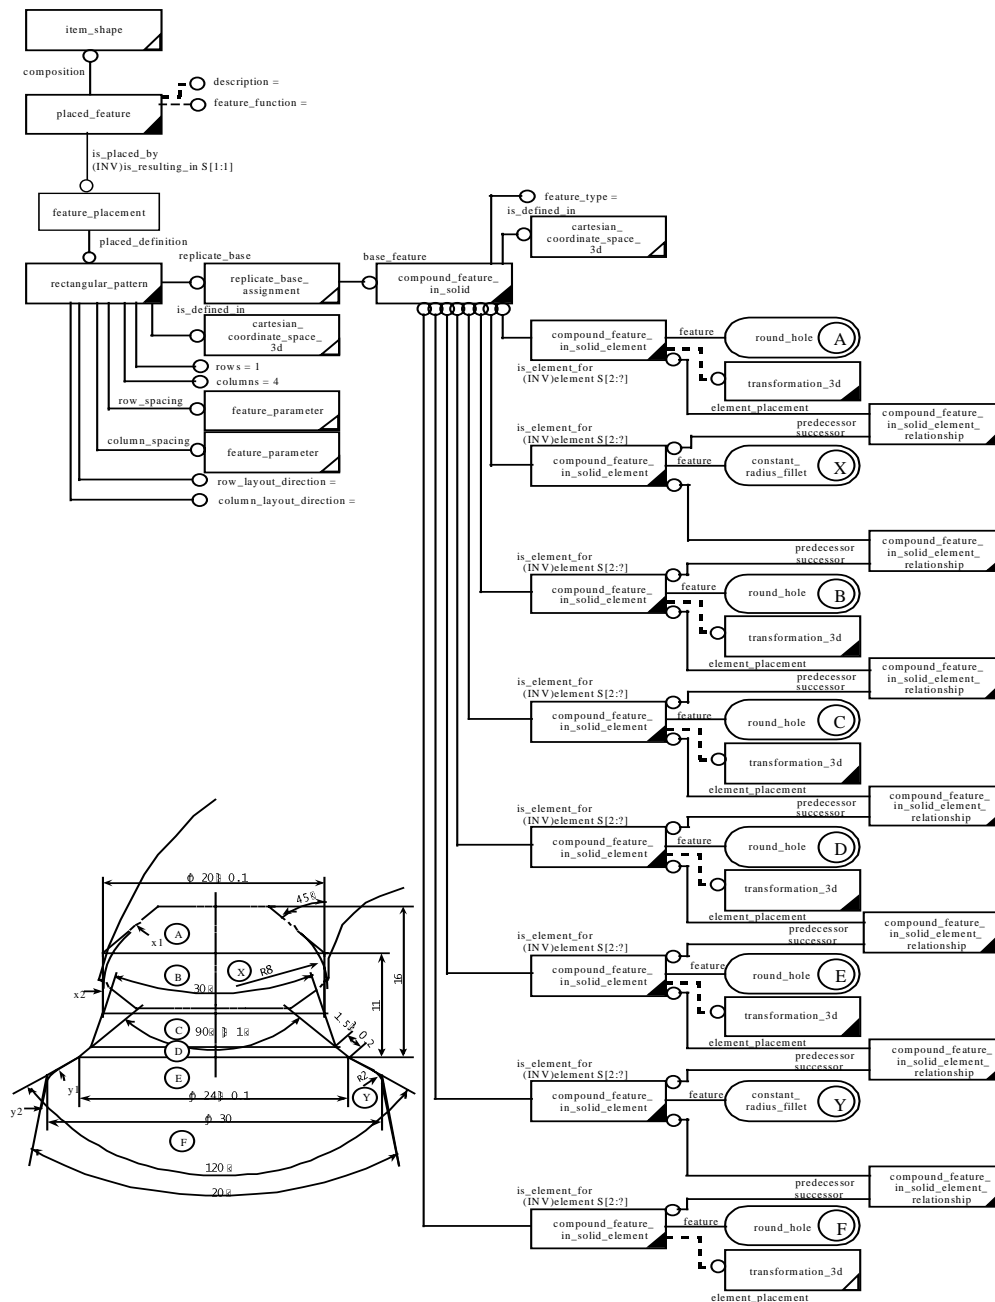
Instance of ignition plug hole when using tolerance without shape
